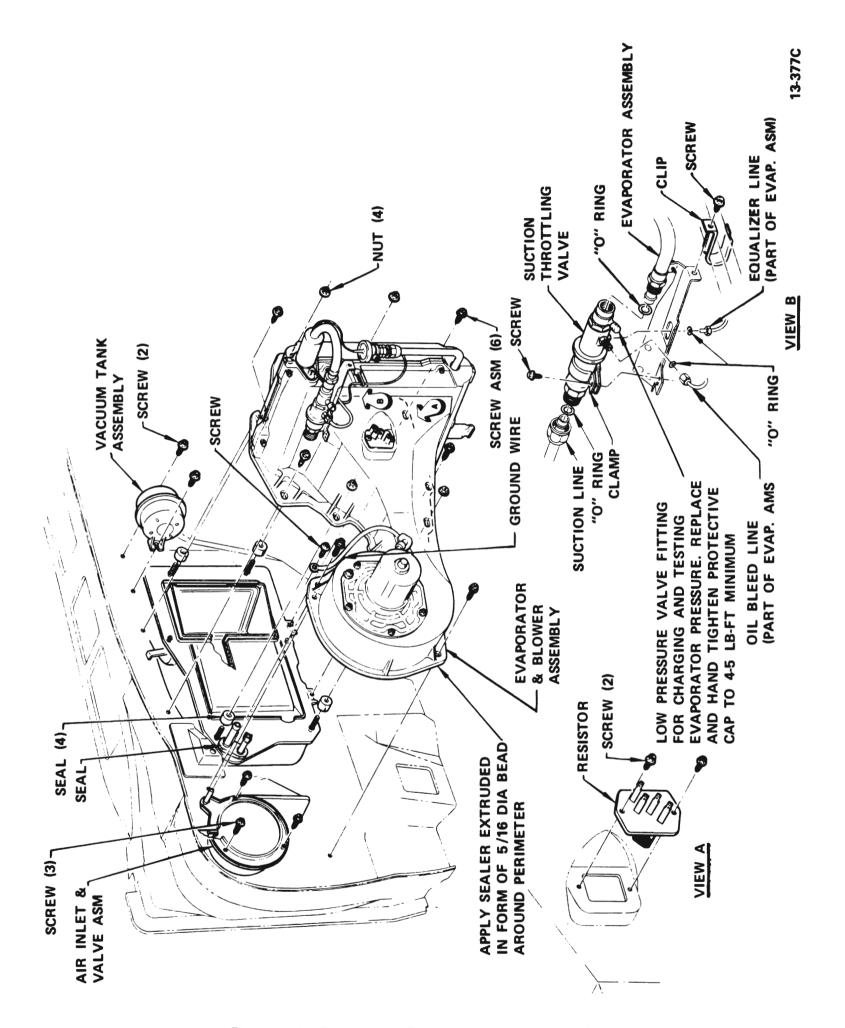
Evaporator - Blower Assembly - 4D-4F-4G-4H
